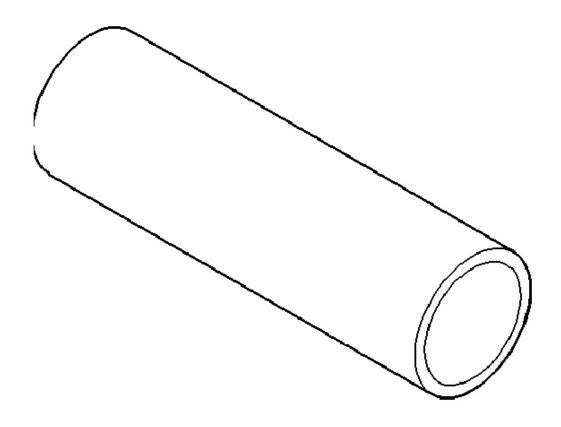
Crankshaft Seal & Sprocket Installer 6780-1 Courtesy of CHRYSLER LLC
